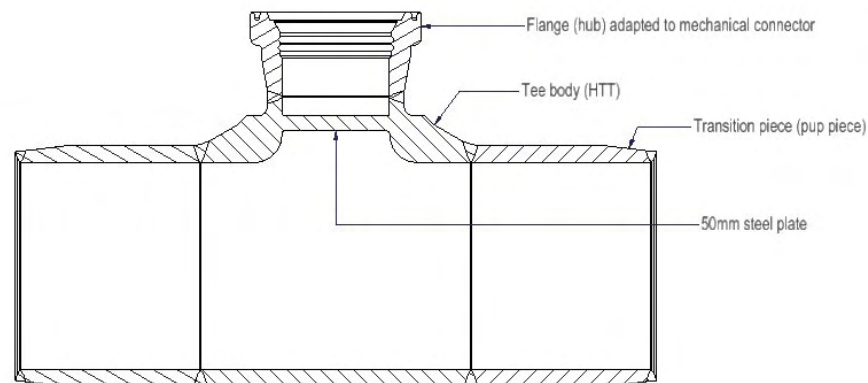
Section view of HTT with 50 mm steel plate[6].
